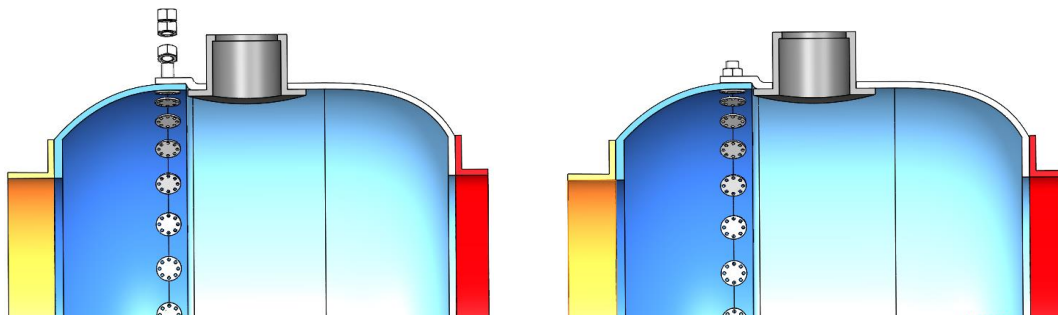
Simplified Assembly view (step 3)    Figure 229 – Simplified Assembly view (step 4)
